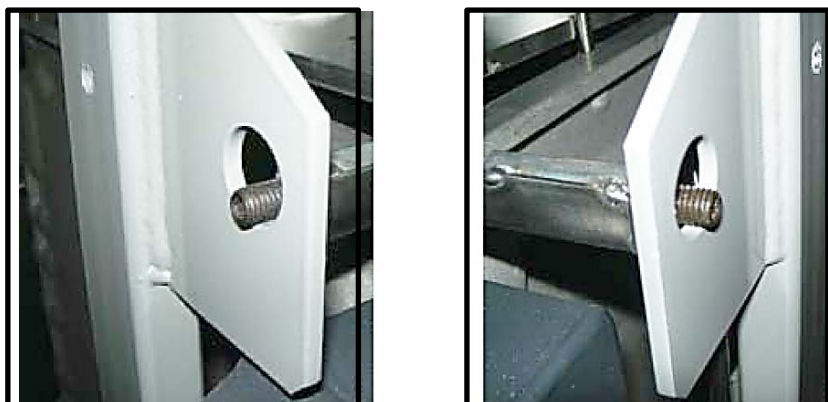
Left and Right Lift Screws Extended into Tab Holes
